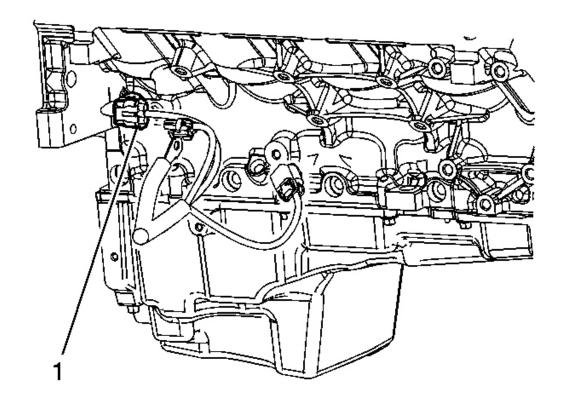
Engine Wiring Harness Electrical Connector & Crankshaft Position (CKP)
